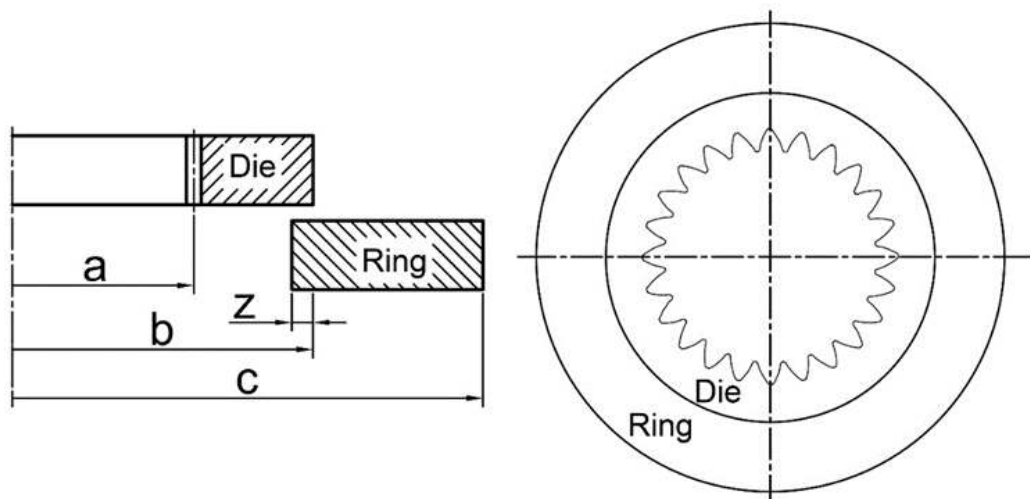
Geometric representation of interference fit single ring gear forging die assembly [80]
